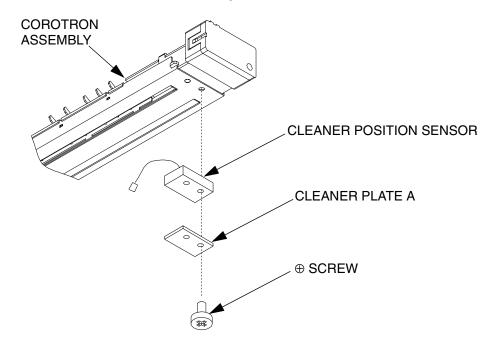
Removal of the Corotron Cleaner Position Sensor
